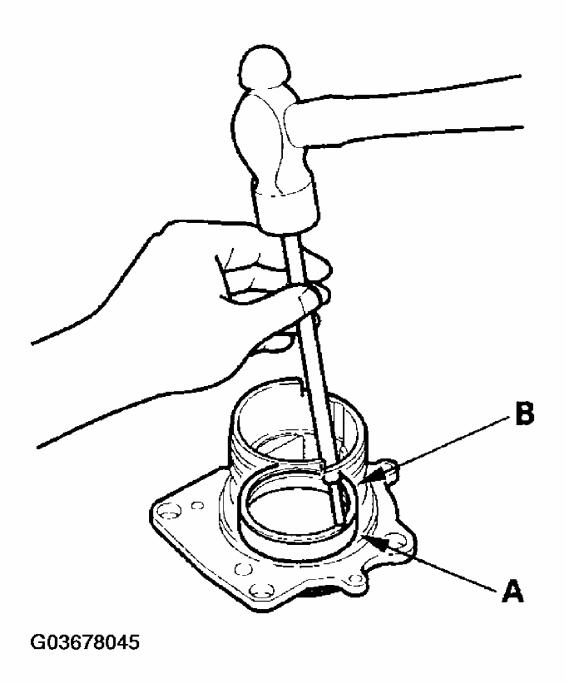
Removing Tapered Roller Bearing Outer Race And 76mm Thrust Shim From Transfer Holder
